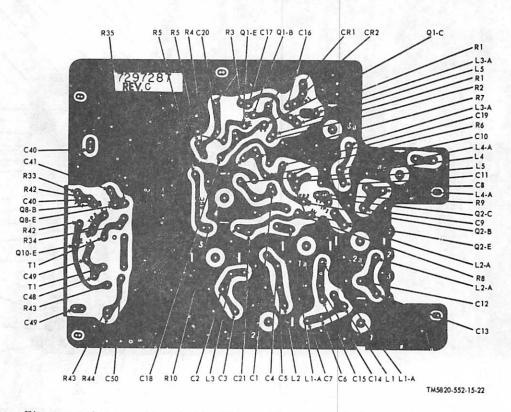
Component terminal locations, receiver assembly A4A7A2 (upper board).
